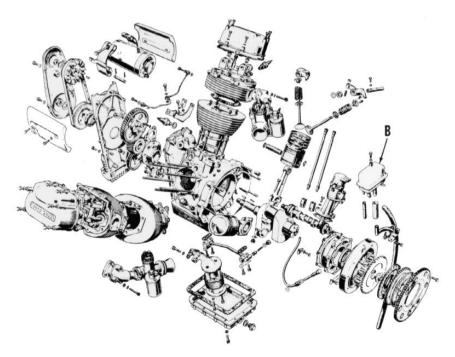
Jens Lyck. Exploded view of an engine, n.d
